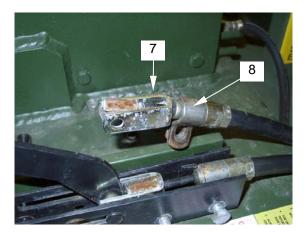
Removing Main Brake Cable from Brake Handle Assembly
